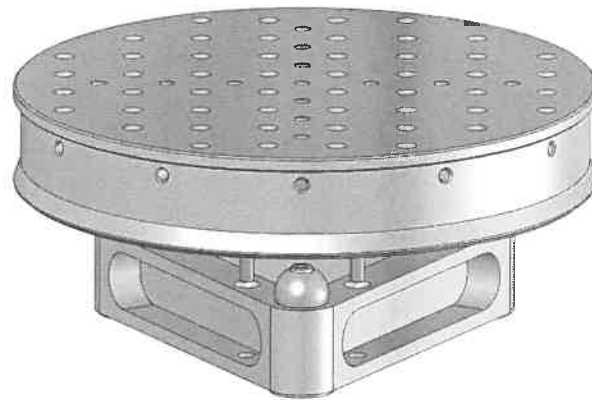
The Universal Interface has a square pattern of (52) M5 x 0.8 threaded holes and (13) Ø5-mm pin holes all on 24-mm centers. It may be moved from the Spindle Mount to the simpler Metrology Mount shown here disengaged.
